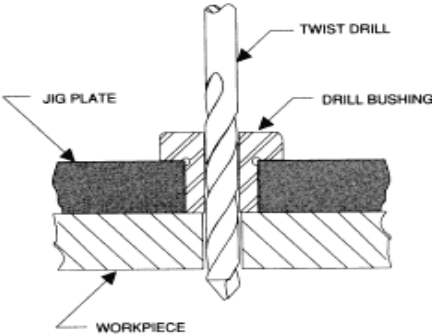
A jigs guiding the tool, in this case the drill bushing
